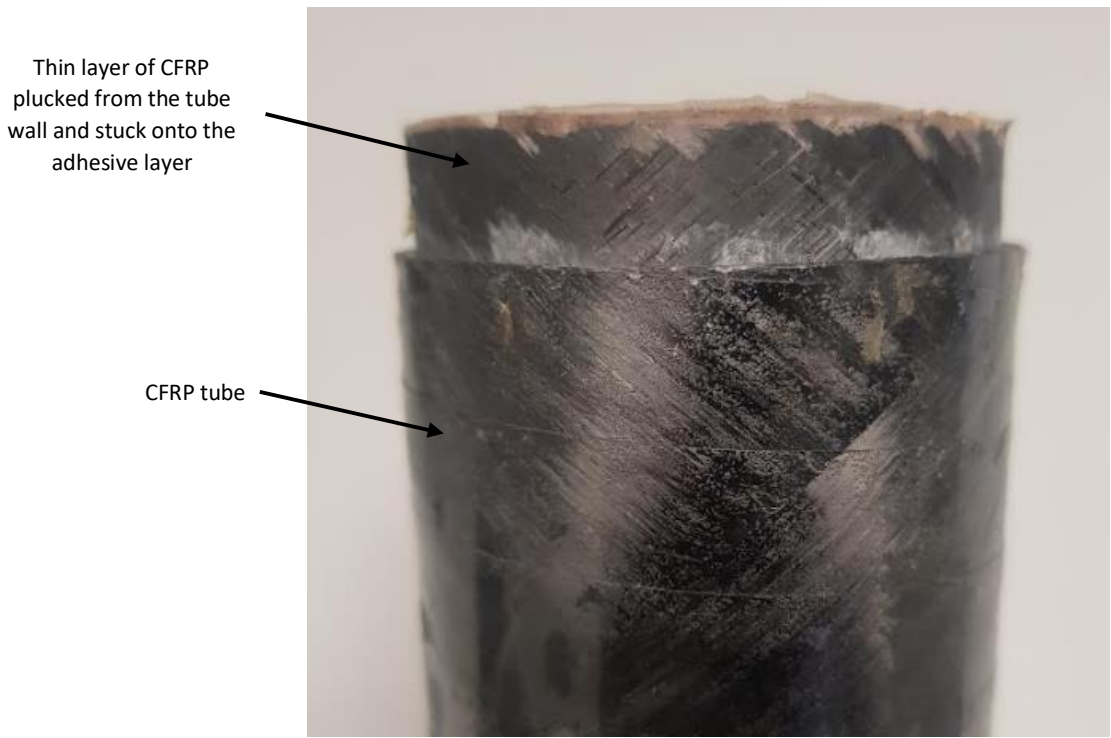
Photograph showing failure due to delamination between the adhesive to CFRP tube wall interface
